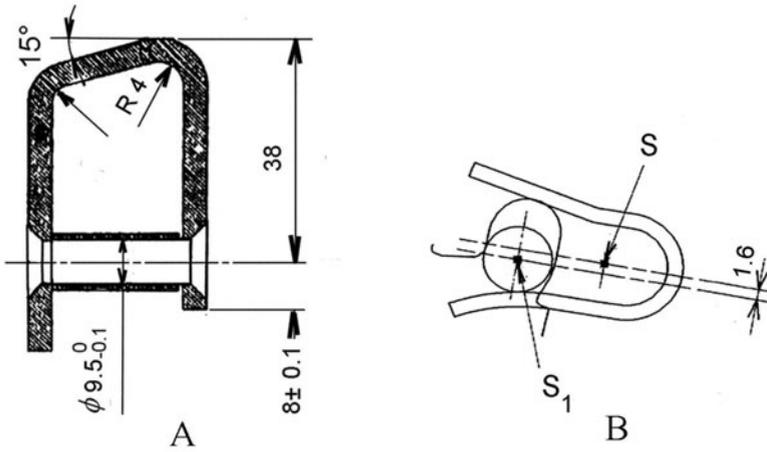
A: section of a striker; B: latch and door sheets cutting, in order to catch the striker pin; S_1 : pin position at first click; S: pin position at closing end.
